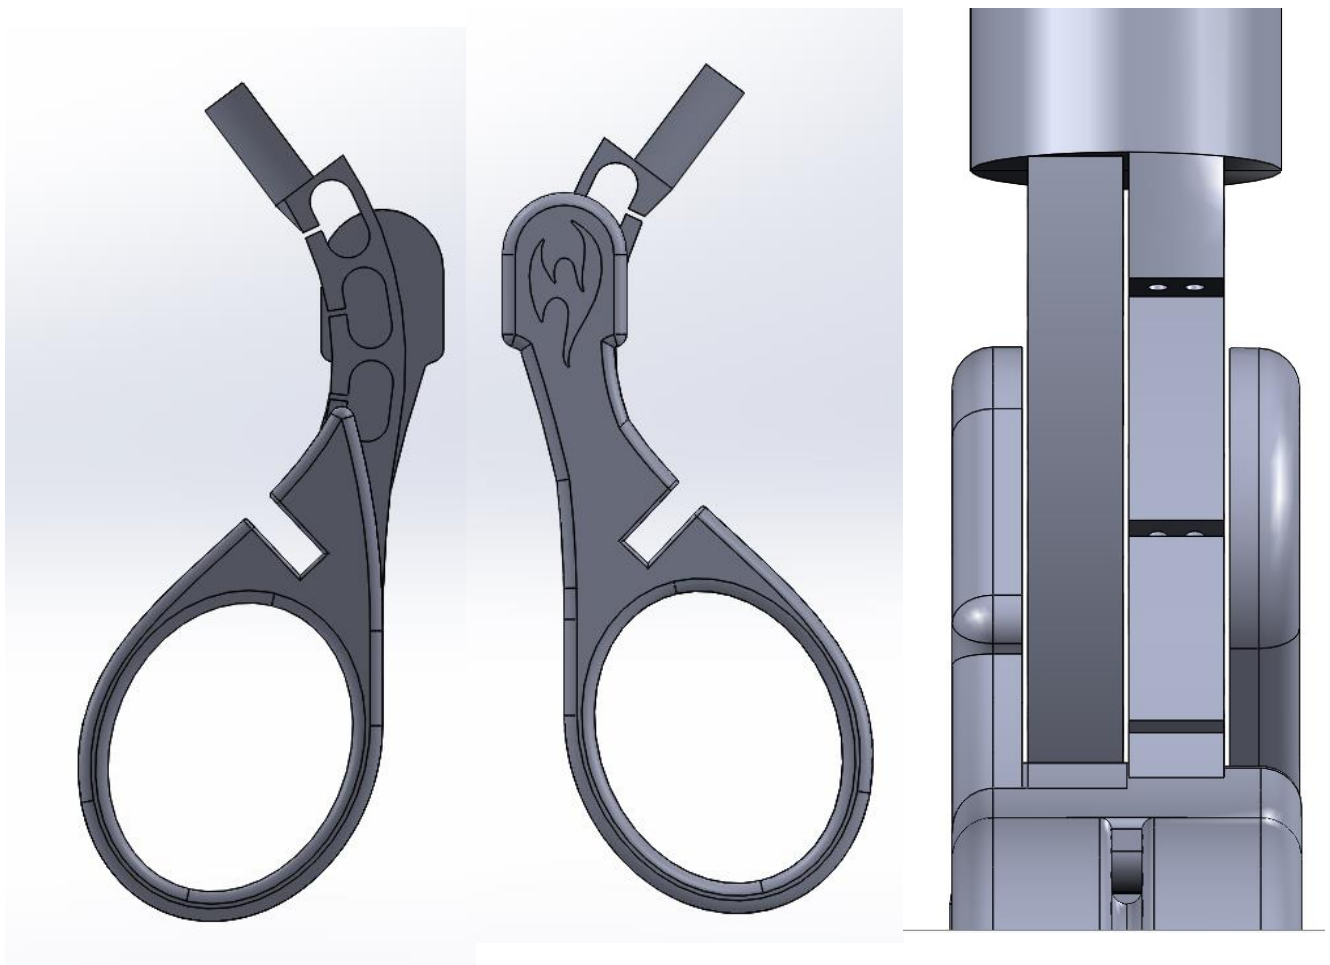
Digital drawings of control handle halves: Left and middle: both sides of a control handle half, right: close-up of bending joint structures.
